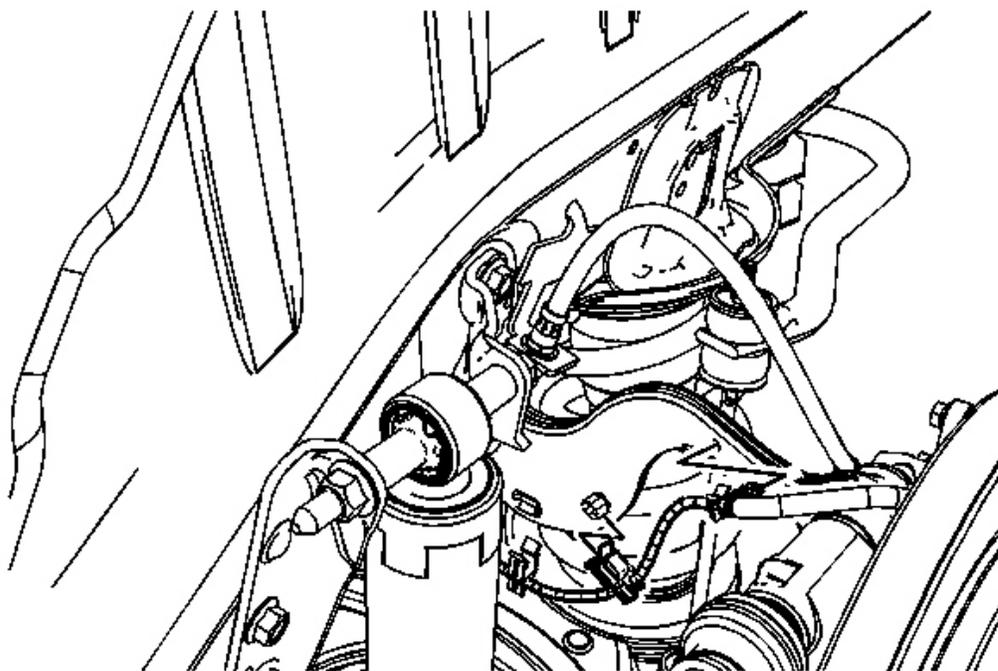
Identifying Wheel Speed Sensor Bolt
